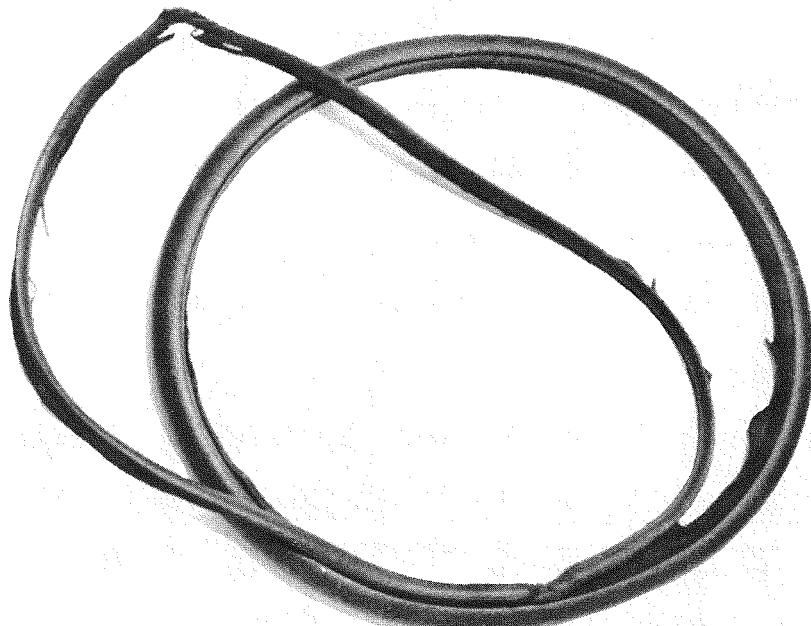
RUBBER O-RING AFTER BEING USED TO FORM GASKET
